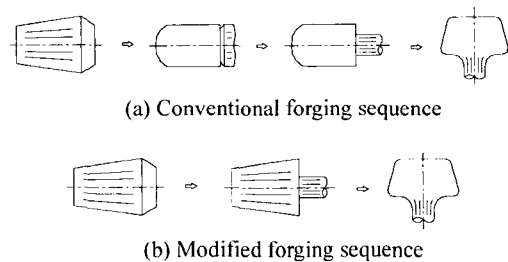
Forging process from ingot to upsetting for crank throw manufacture
